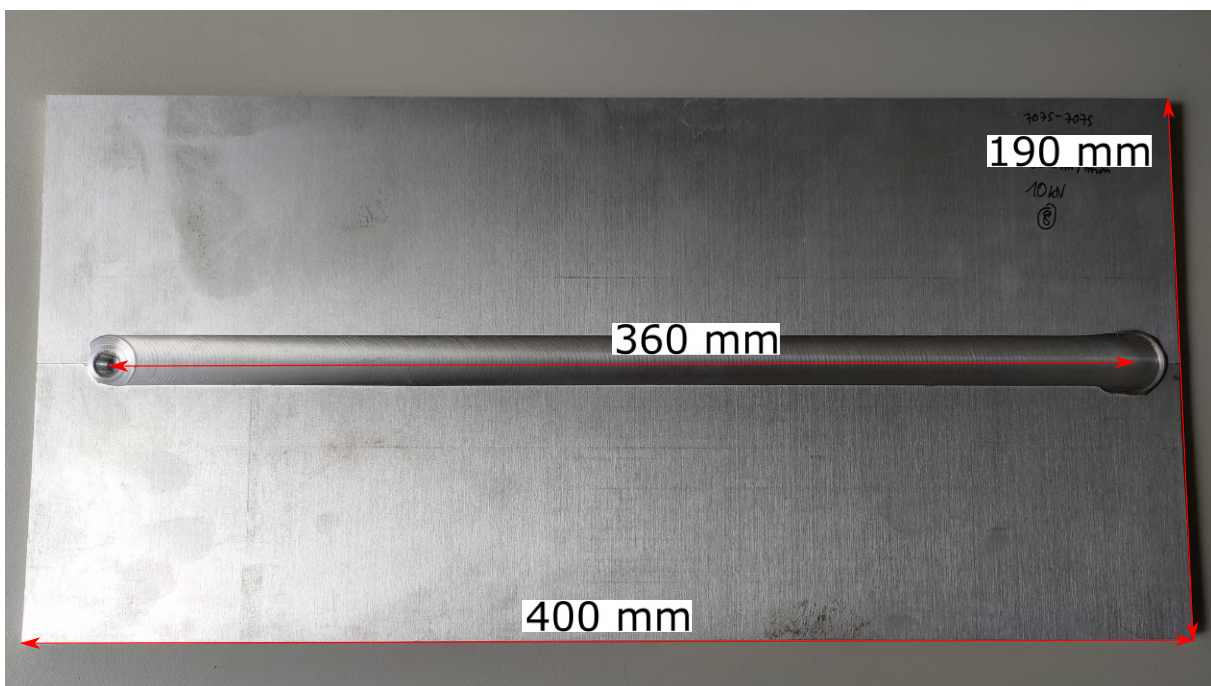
Example of a long 360 mm weld performed on a similar AA7075 plate. The plate are marked with their respective welding parameter.
